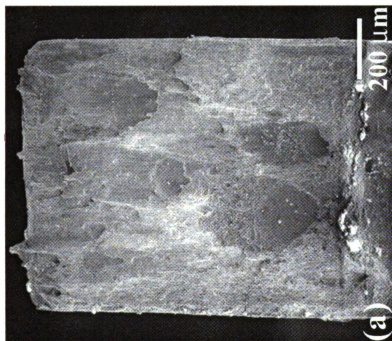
Representative fracture surface of the creep solder joint.
